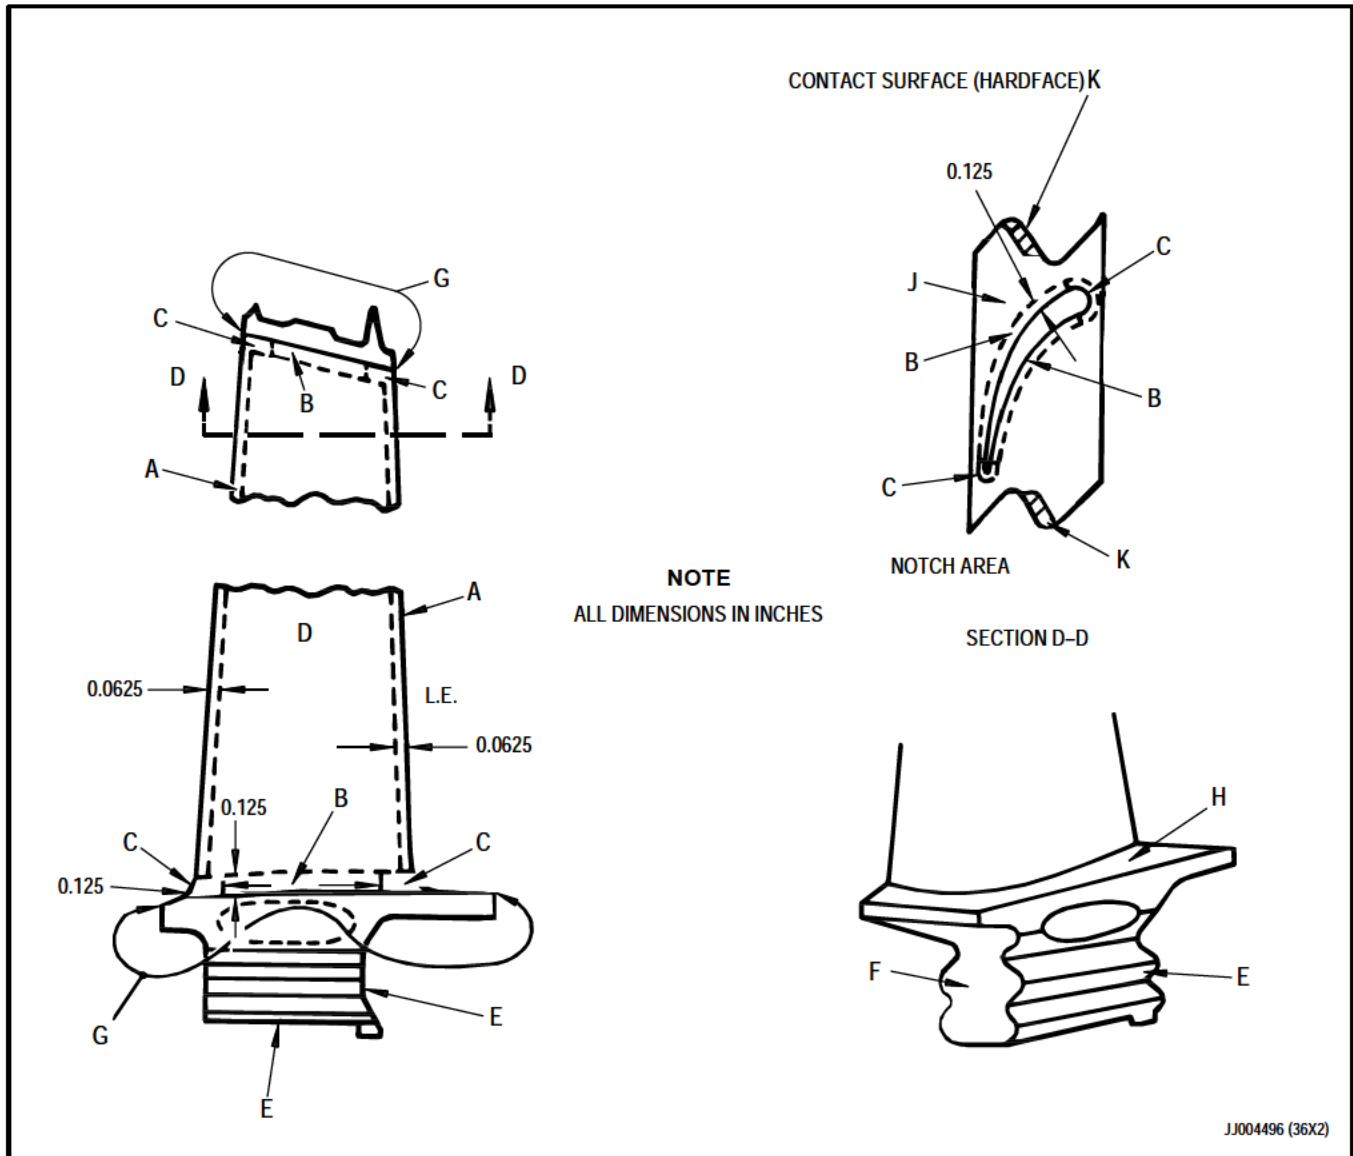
Fourth Stage Turbine Rotor Blade - Knife-Edge Seals Blend Repair Limits
